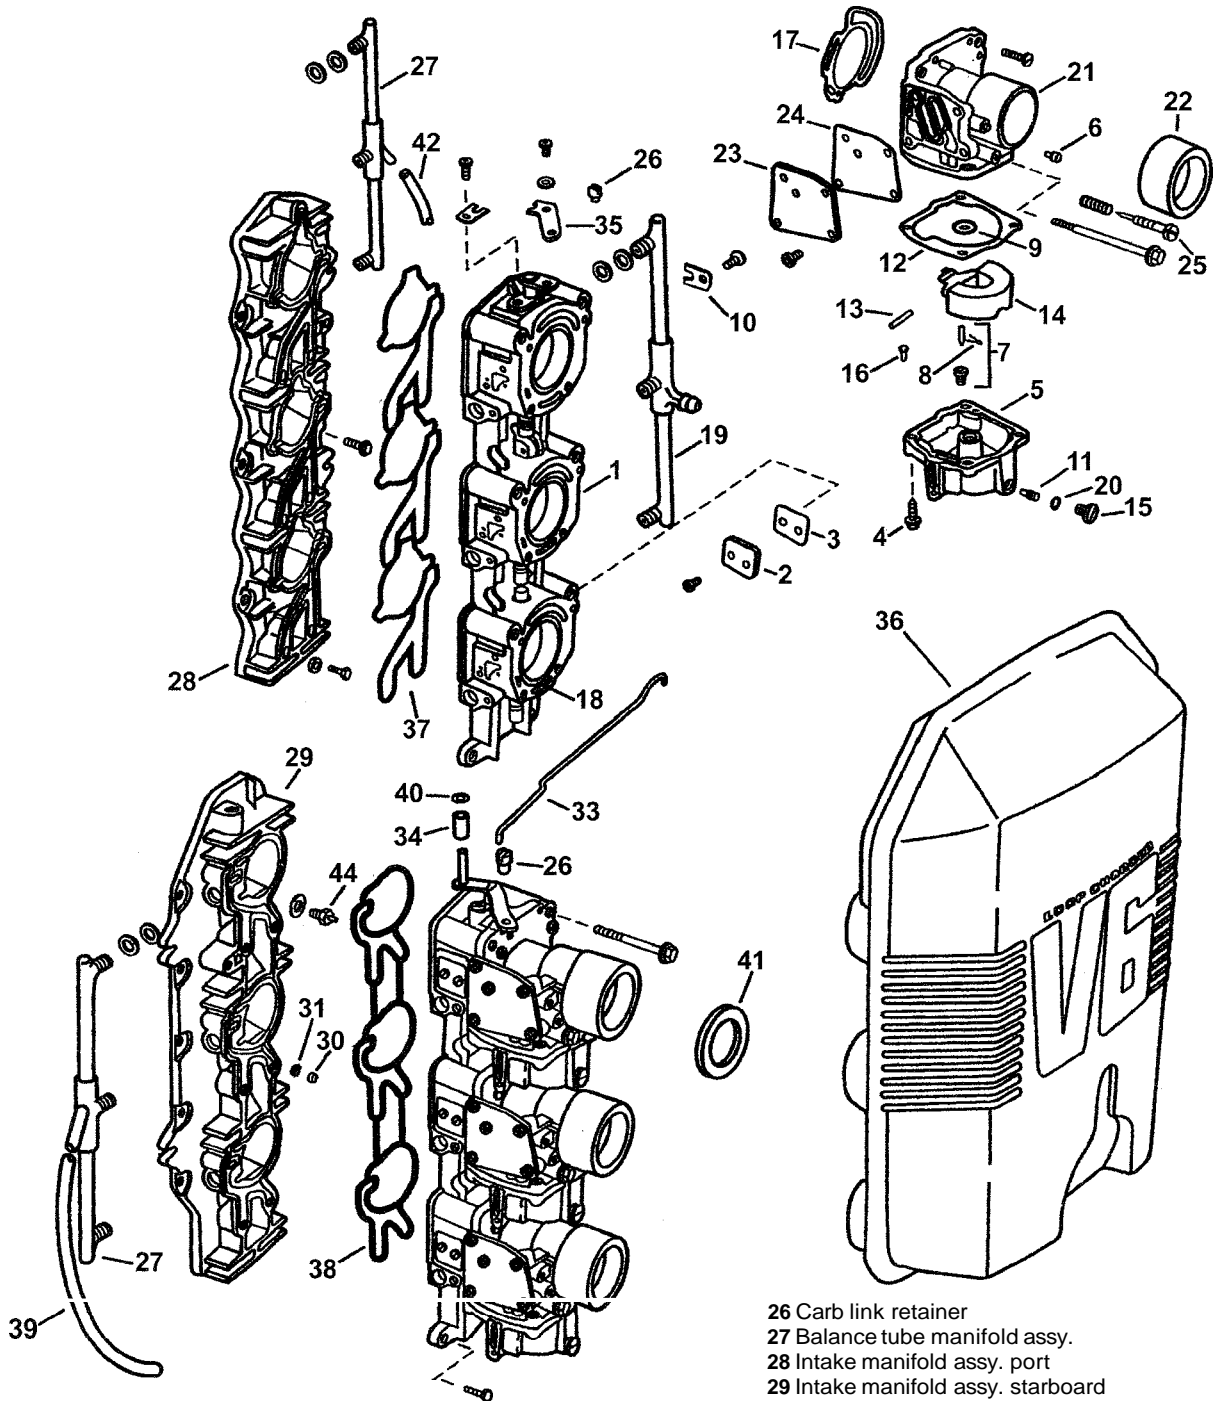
Clear view of the triple throat carburetor assembly used by 80 Jet—175hp 60° V6 powerheads. This arrangement consists of 3 single throat carburetors mounted on a single throttle plate
